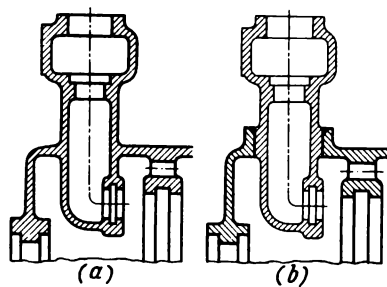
Solid-cast (a) and welded-cast (b) designs
